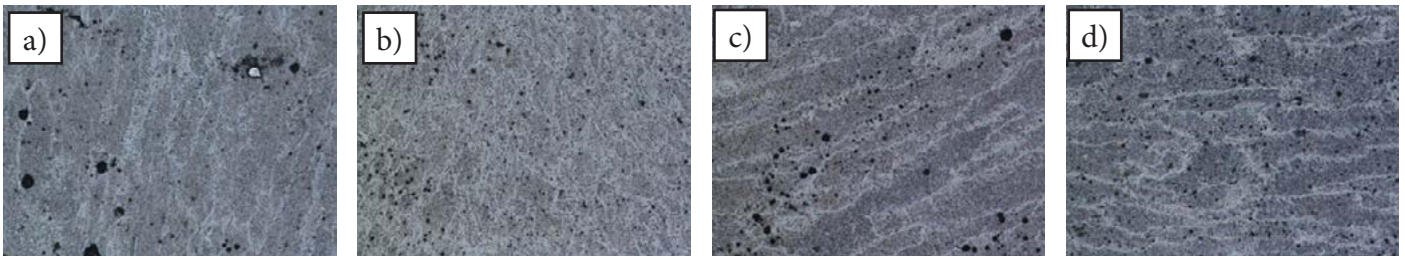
Macrostructures of the welds areas in the T-joints: FW1 (a), FW2 (b), FW3 (c) and FW4 (d)
